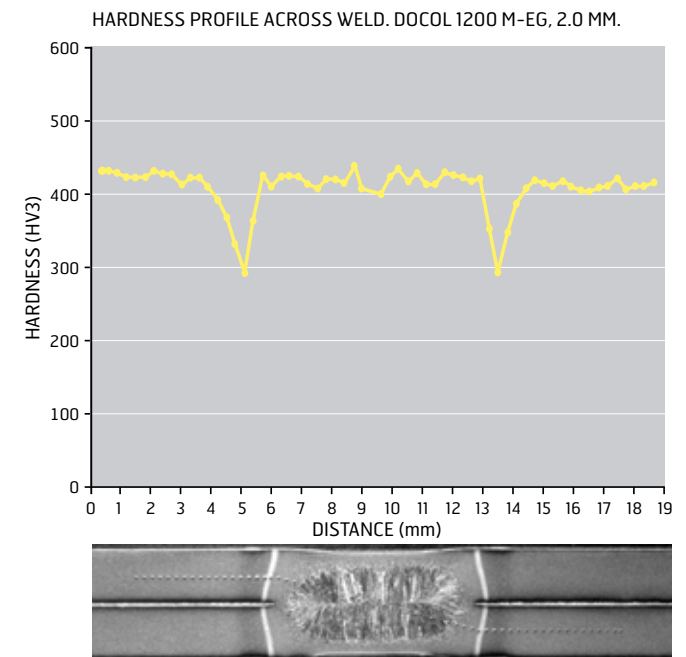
Cross section and hardness profile of spot weld for Docol 1200 M-EG 75/75 (sheet thickness 2.0 mm) spot welded to itself. Welding data: cap type B 20/8, electrode force 4.5 kN, welding time 480 ms, hold time 300 ms, welding current 7.54 kA.
